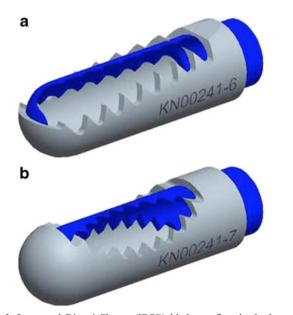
Integrated Bigatti Shaver (IBS®) blades: a flute beak shape b shark jaws shape
